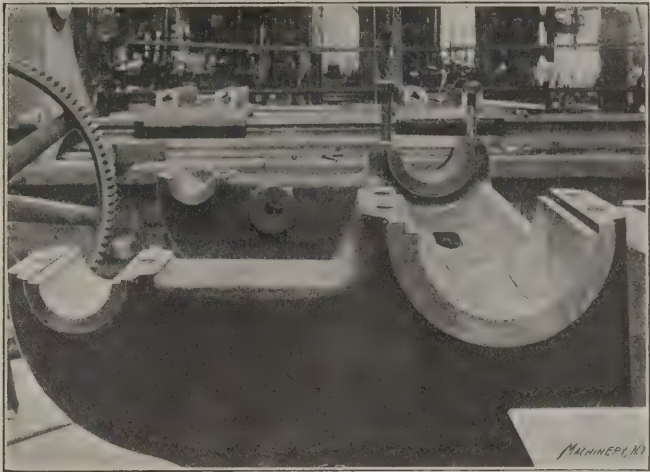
Large Headstock Framed with Cast Iron Bearings. Note Oil Grooves.
